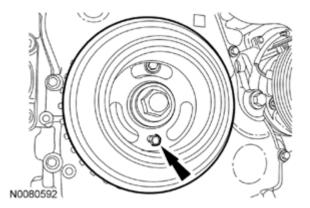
View Of Crankshaft Pulley And 6mm x 18 mm Bolt Courtesy of FORD MOTOR CO.
